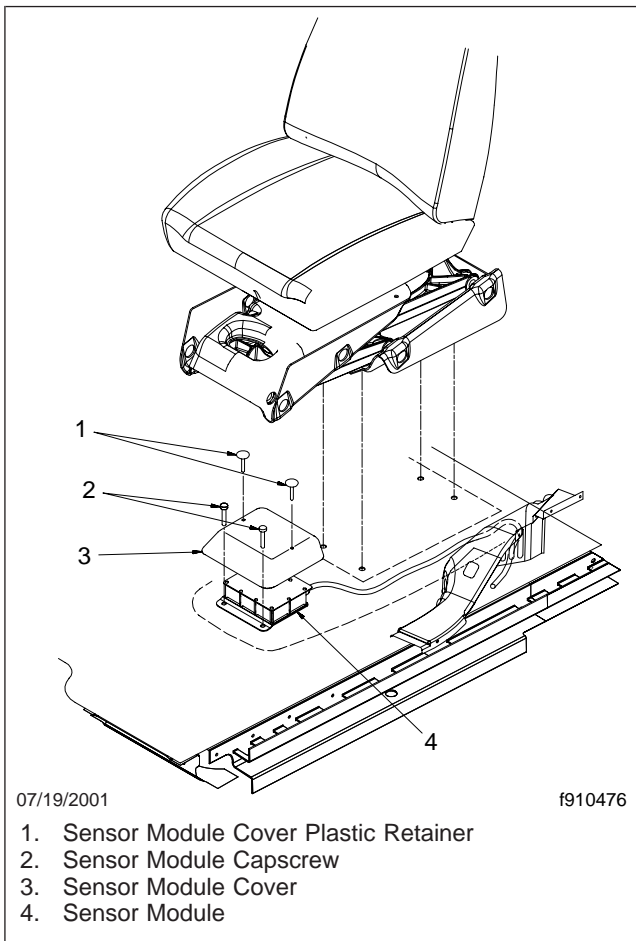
, EzyRider Seat With Air Bag Sensor Module
